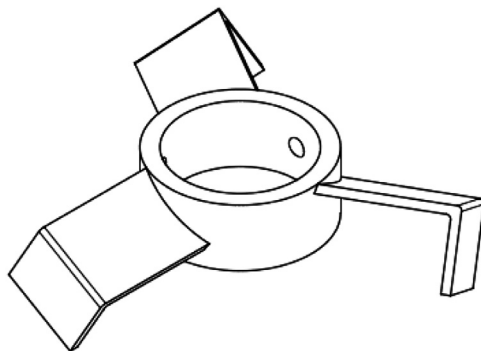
Axial pumper impeller. *Courtesy of Myers Engineering, Inc.
